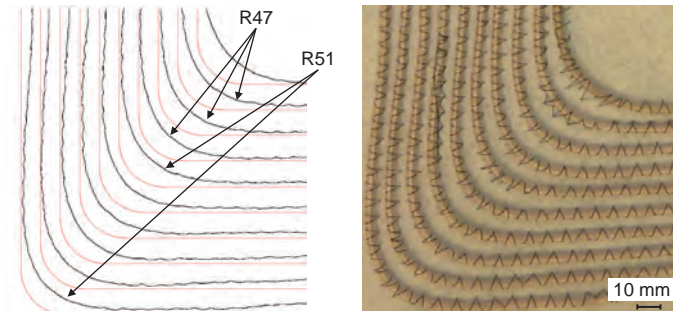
Results of HF-Litz wires laying tests with a sewing machine (radii).
